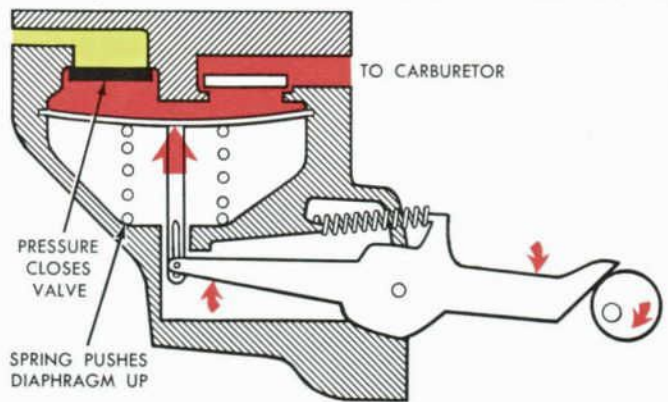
Mechanical Fuel Pump—Discharge Stroke
